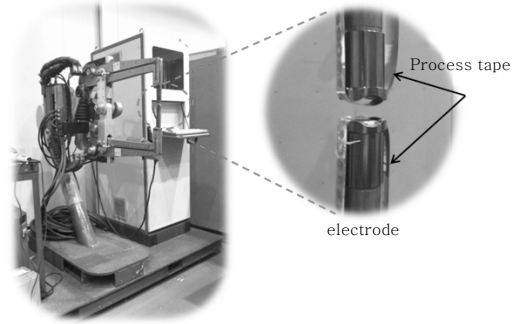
Inverter DC resistance spot welding machine using process tape
